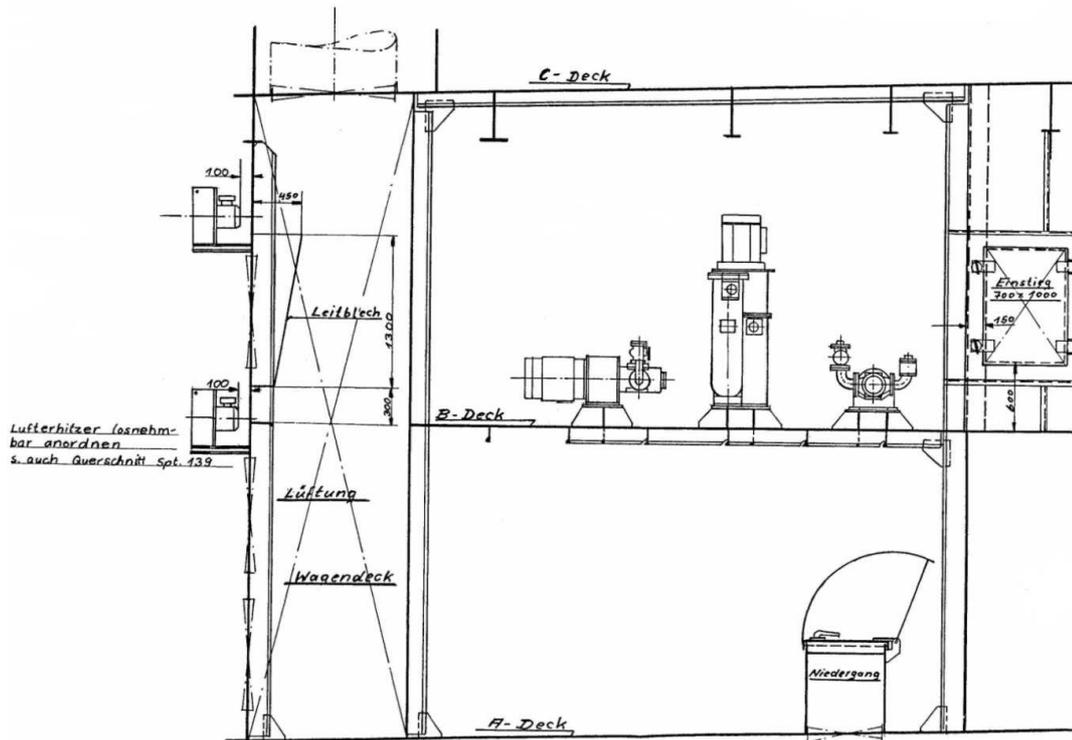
Front Wing House, starboard side, lateral view, Drawing S590 – 24/3
